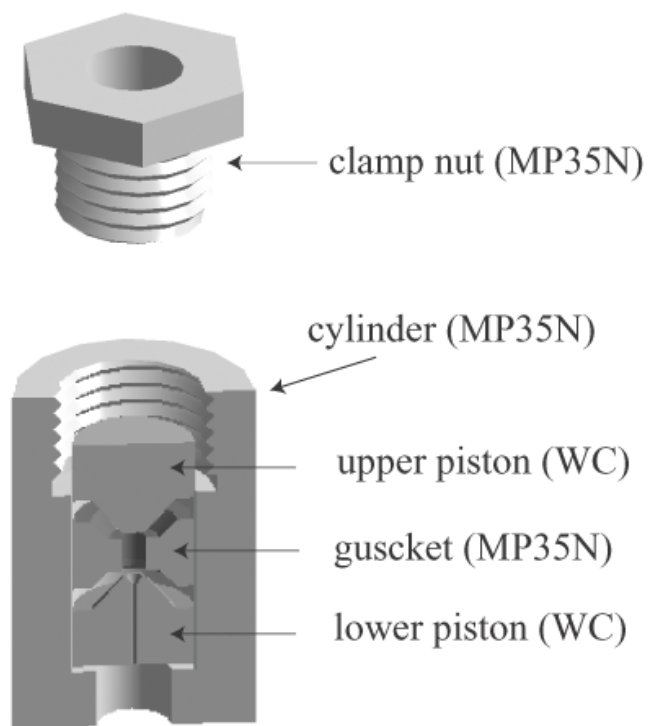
Cross-section view of the lower part of the apparatus <sup>88)</sup>.
